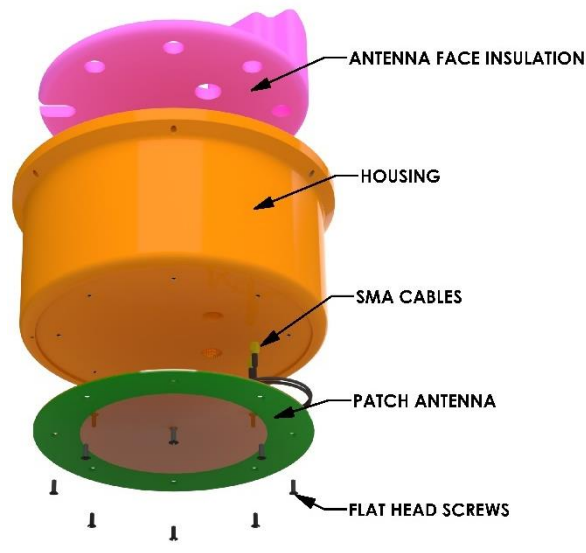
Exploded view of the Housing and Patch Antenna subassembly with component labels
